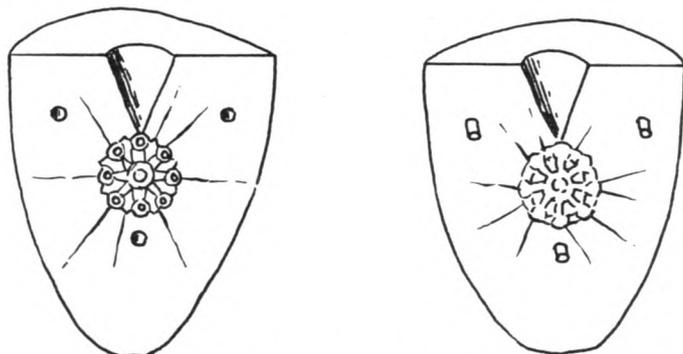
The two halves of cuttlebone mould showing pour, impression, locating pins and scratches to release air
